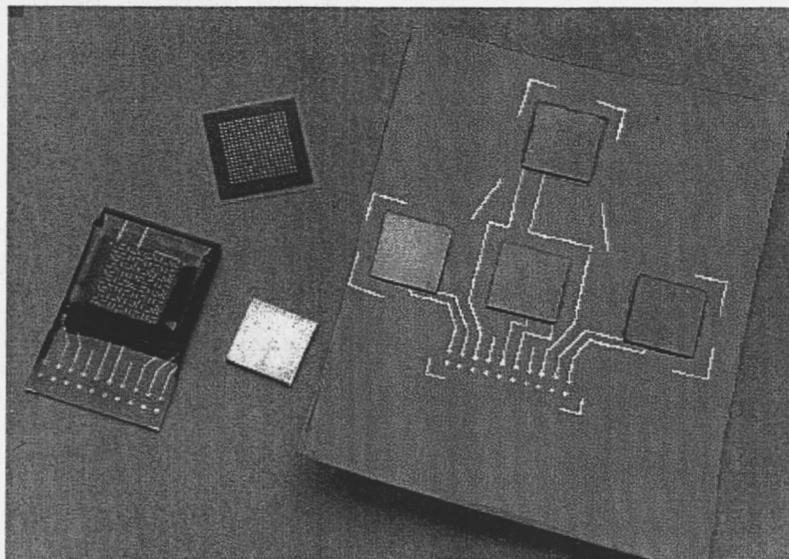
Folded Stack 3-D Assembly. [Johnson.doc]
